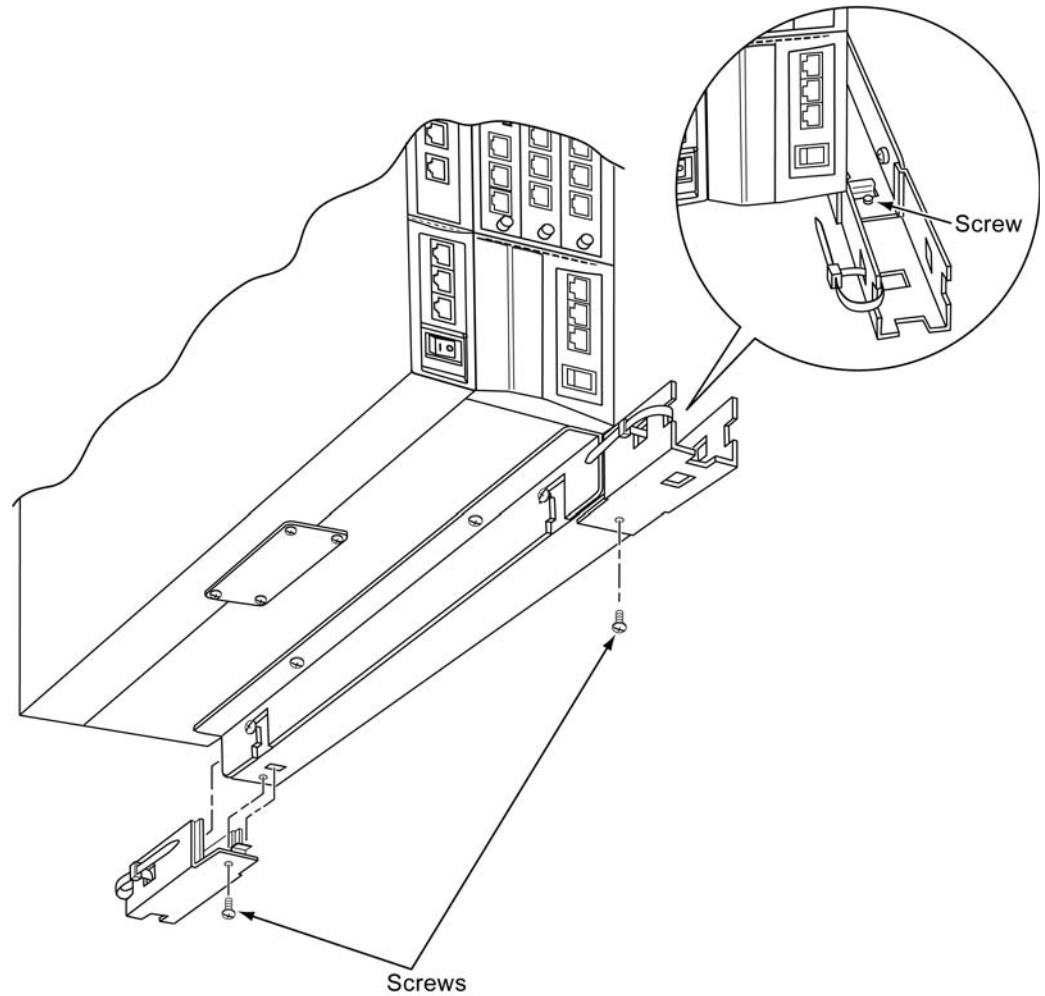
Attach Cable Support Bracket to Lower Wall Mount Bracket
